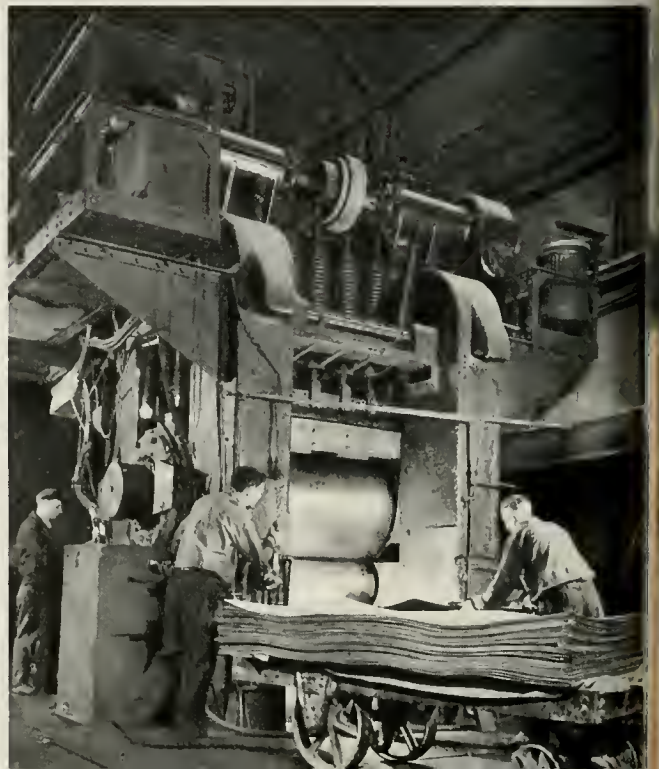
(Upper left). Rough-grinding stainless steel, Wood Works. The operator is slushing grease on the sheet.
